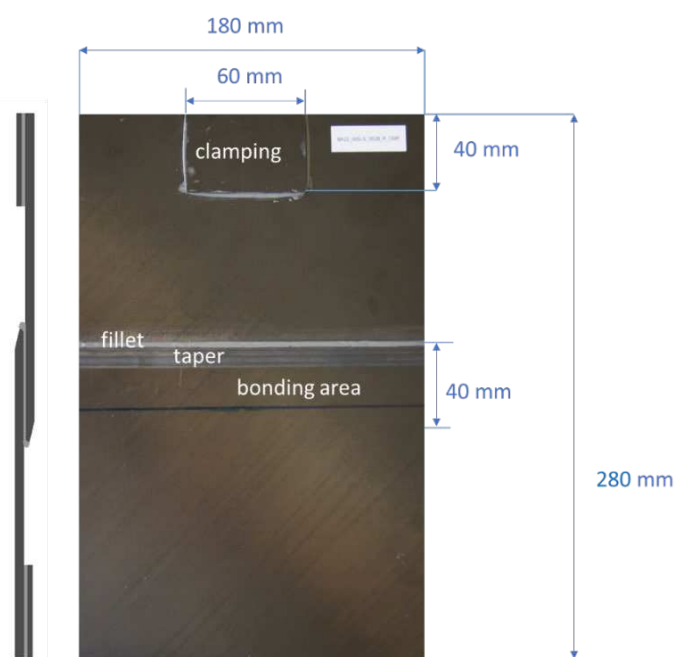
Dimensions of small WSLs coupon. The fillet is controlled with the bonding jig.
